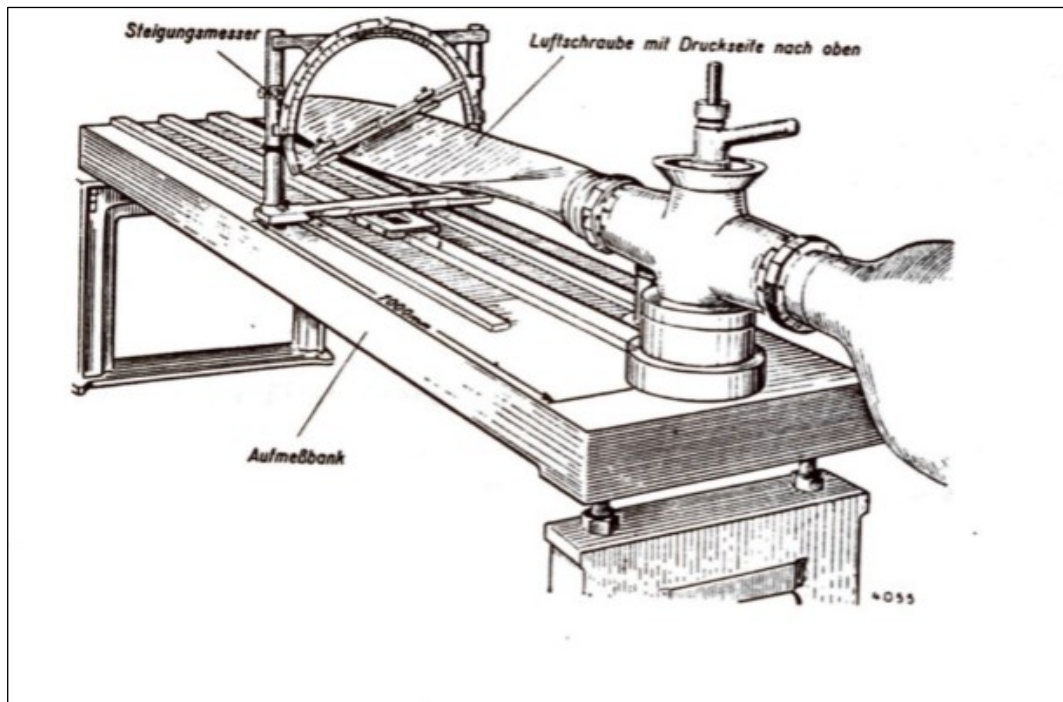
Adjusting the blade pitch on the measuring bench: Source: “Junkers Metall-Luftschrauben” (Junkers metal propellers).
